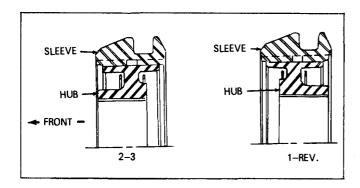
B-13 Synchronizer Sleeve and Hub Assembly
